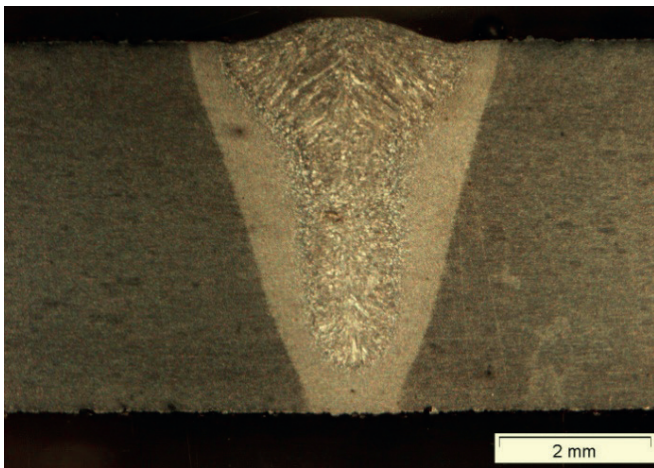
Macrostructure on cross section of the bead-on-plate weld produced at laser power 2500 W and welding speed 1000 mm/min (heat input 156 J/mm)
